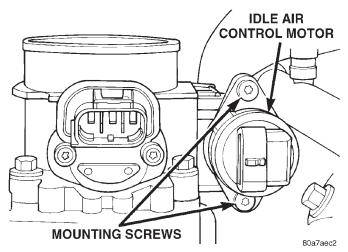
Mounting Bolts (Screws)—IAC Motor
